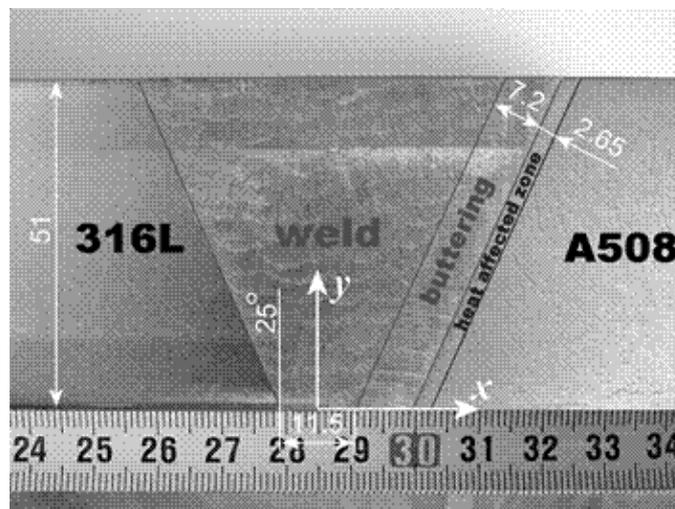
Cross-section of the bi-metallic weld of AD01 mock-up
